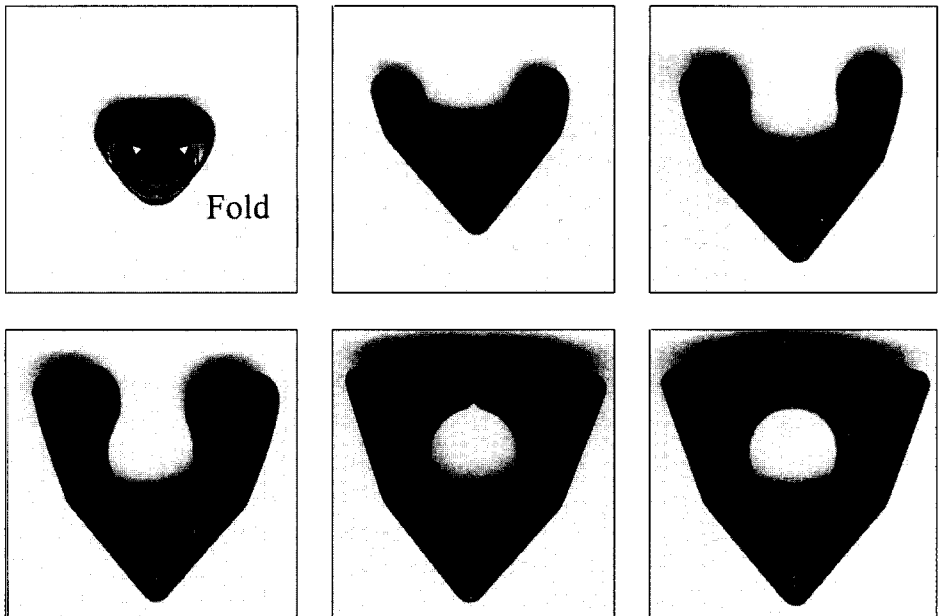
Photographs showing the shape generation for the insert during progressive die filling.
